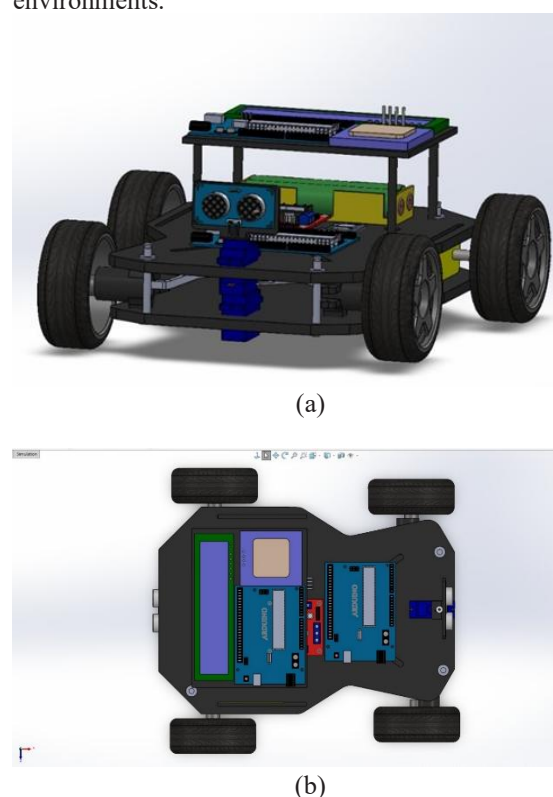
Prototype design on SolidWorks (a) Front view, (b) Top view.
